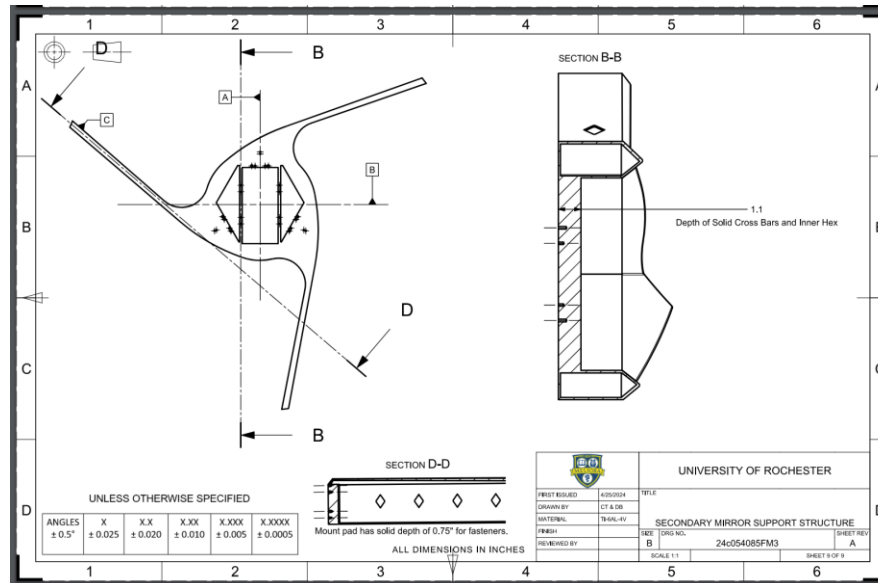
Section View Drawing for Solid Hex and Mount Pad Face Dimensions.
